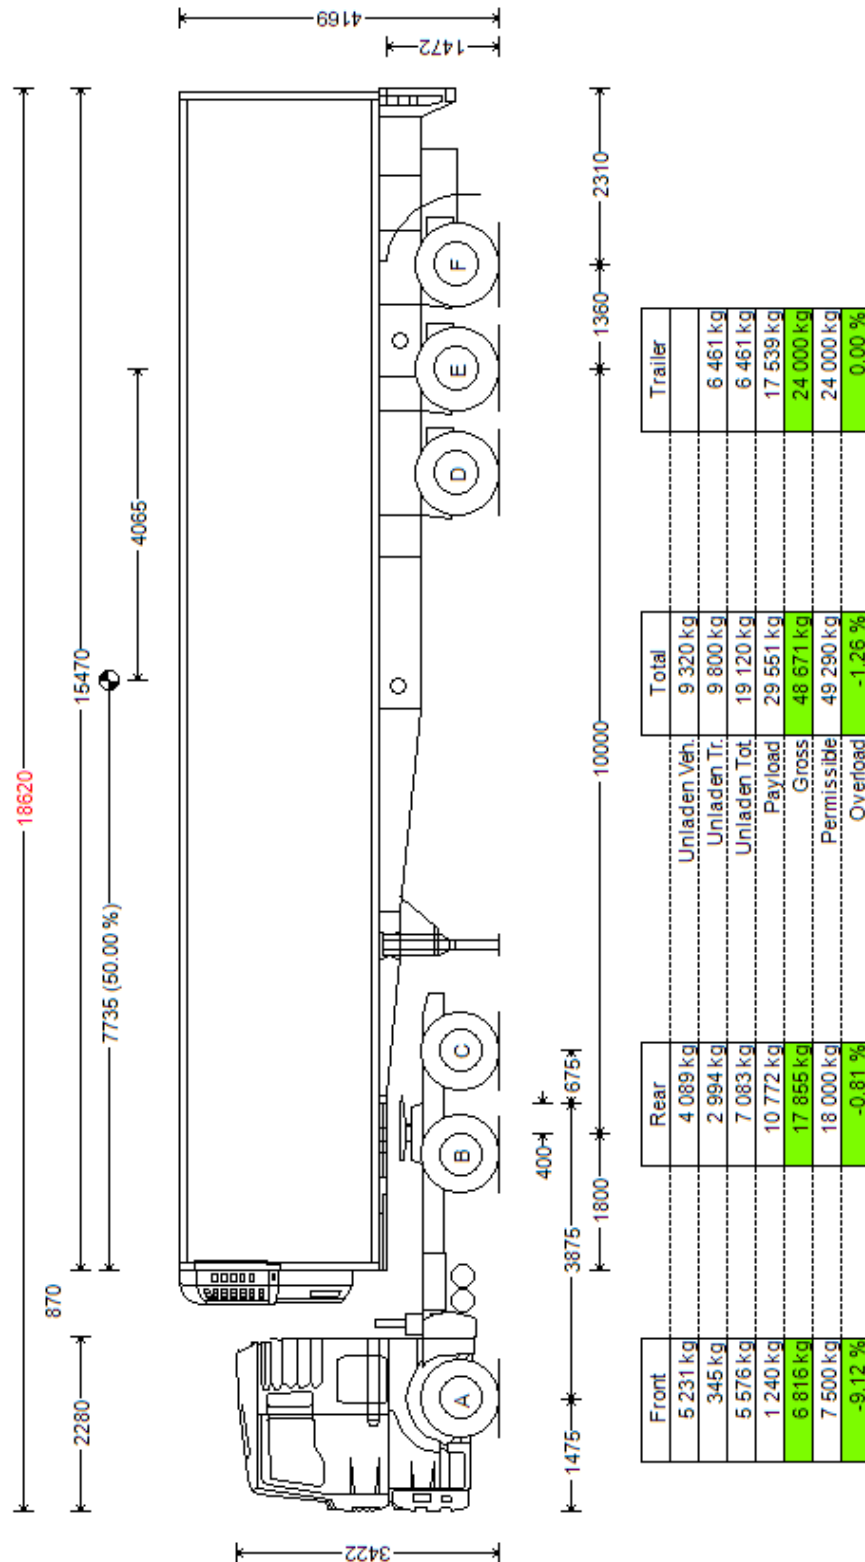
Layout dimensional drawing of Refrigeration semi-trailer
